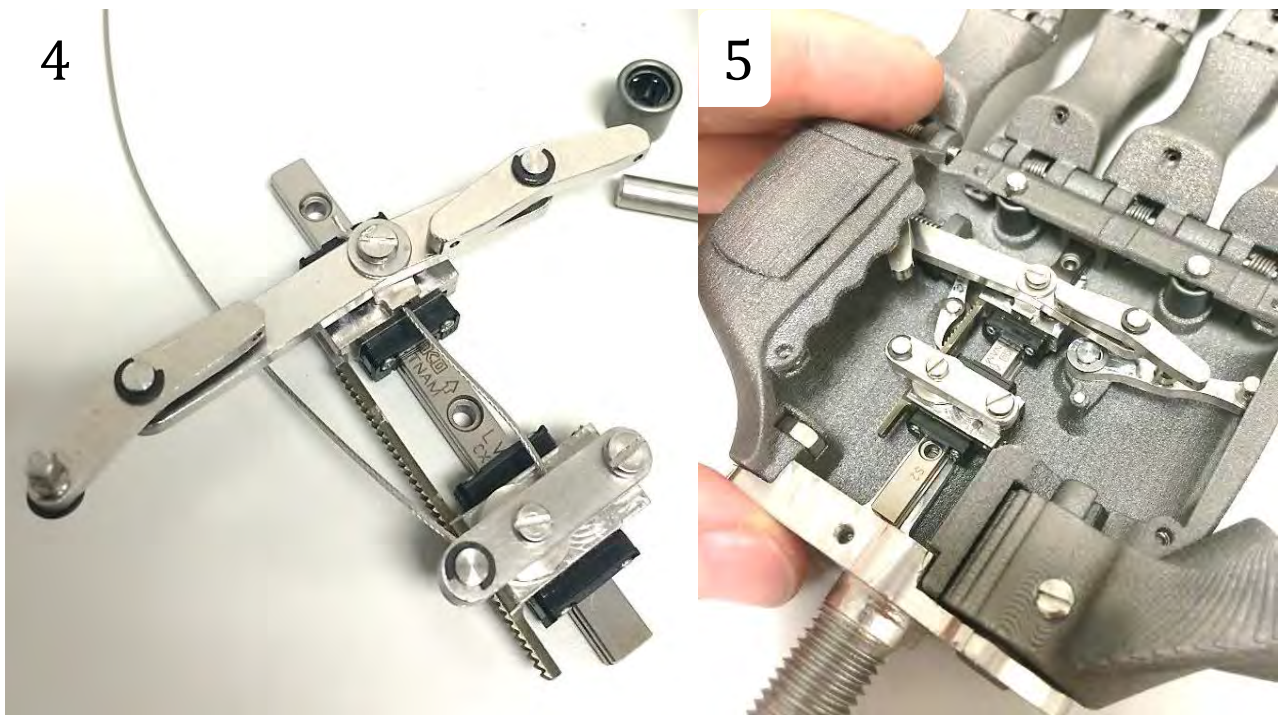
Wrist-stem and linear-bearing rail assembly stages (Part 2).
